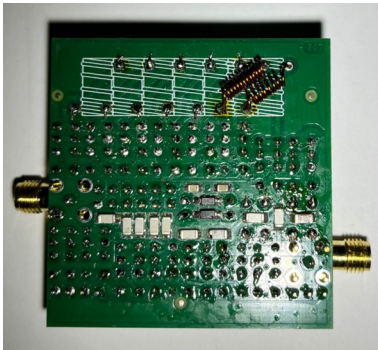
Coil L2 (0.10 uH) soldered on the left, coil L1 (0.05 uH) soldered on the right side
